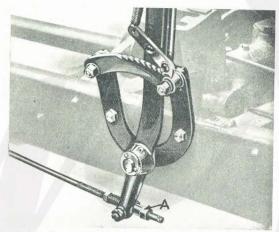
The Brake Adjustment on the Lower End of the Hand Lever of the 14 h.p. "Standard."
